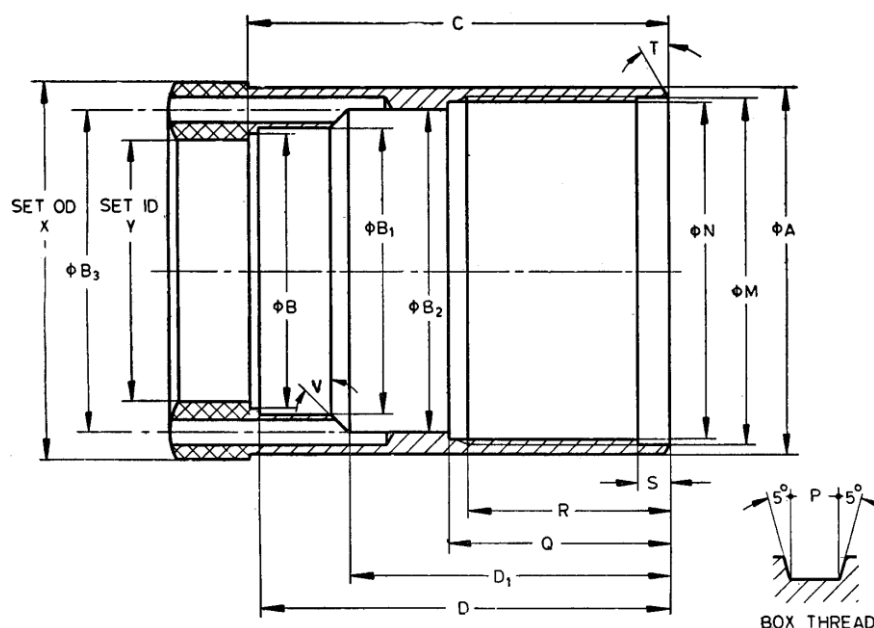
'WF' DESIGN DOUBLE TUBE CORE BARREL — CORE BIT
